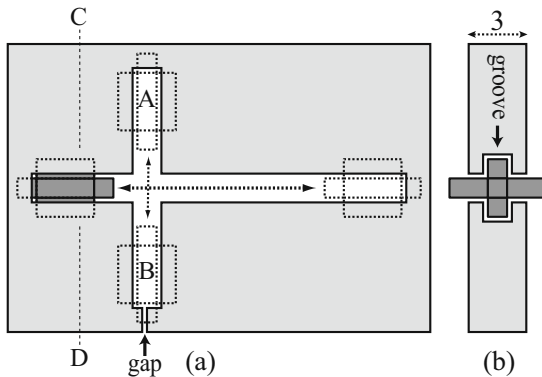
(a) A board with a cross-shaped hole. (b) A section view between C and D.
